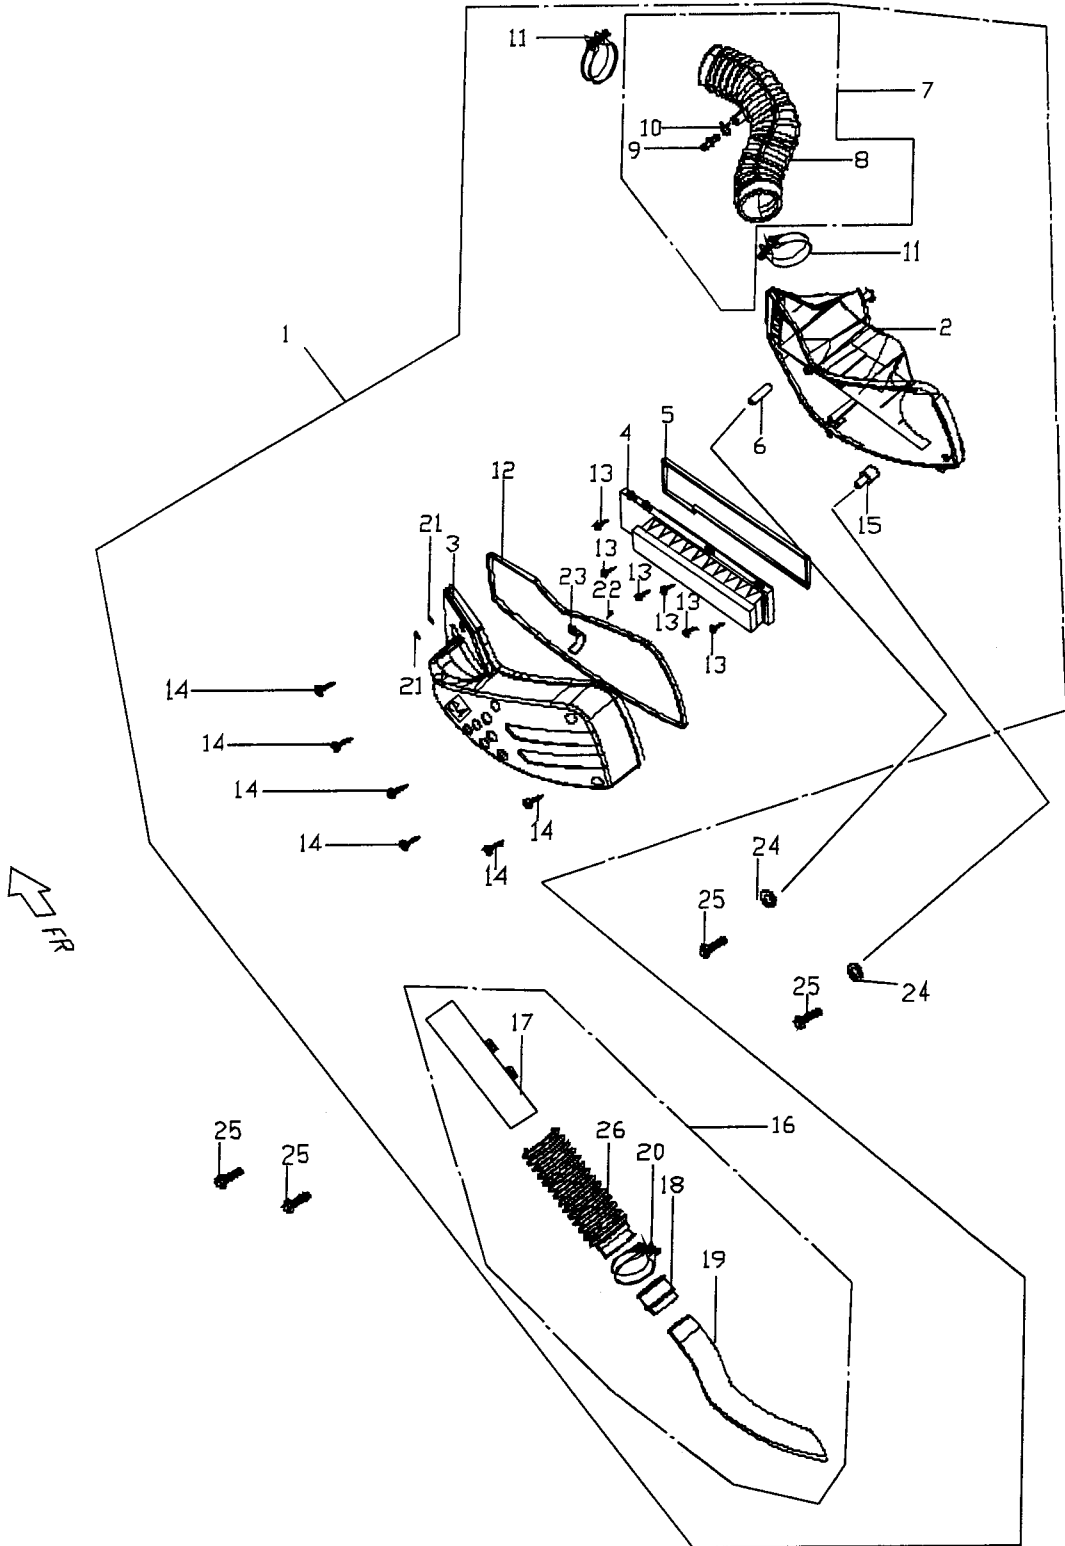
ENGINE AIRCLEANER ASSEMBLY
